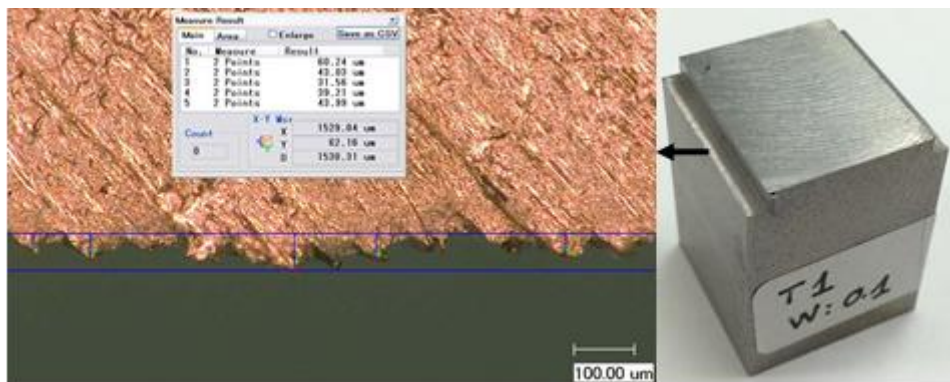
Measurement of exit burr for steel C: 0.45 % workpiece material in test number 1 using tool with 0.1 mm of flank wear.
